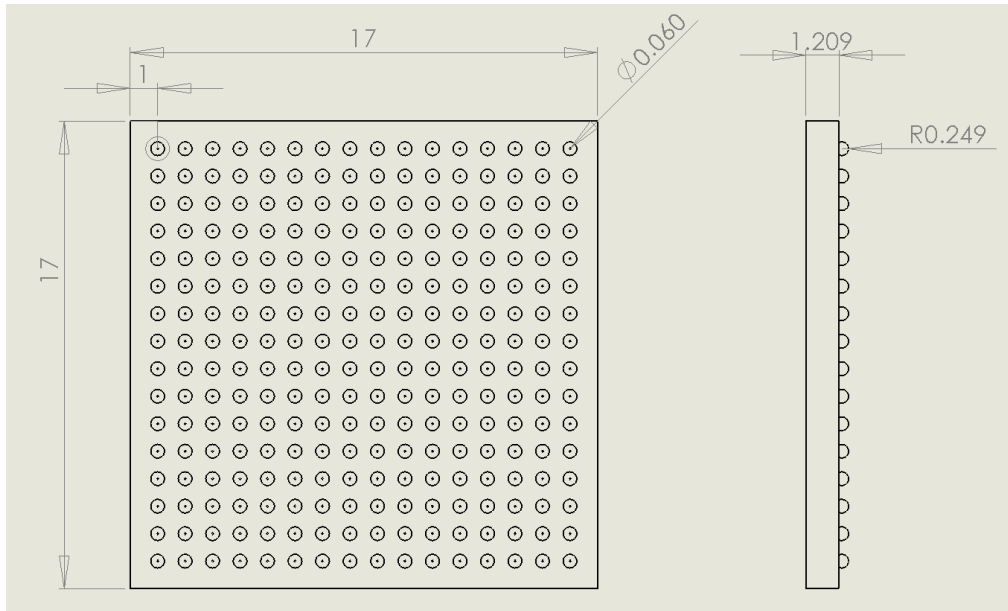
Bottom and side dimensions of AD6636 (256-lead BGA) in mm.
